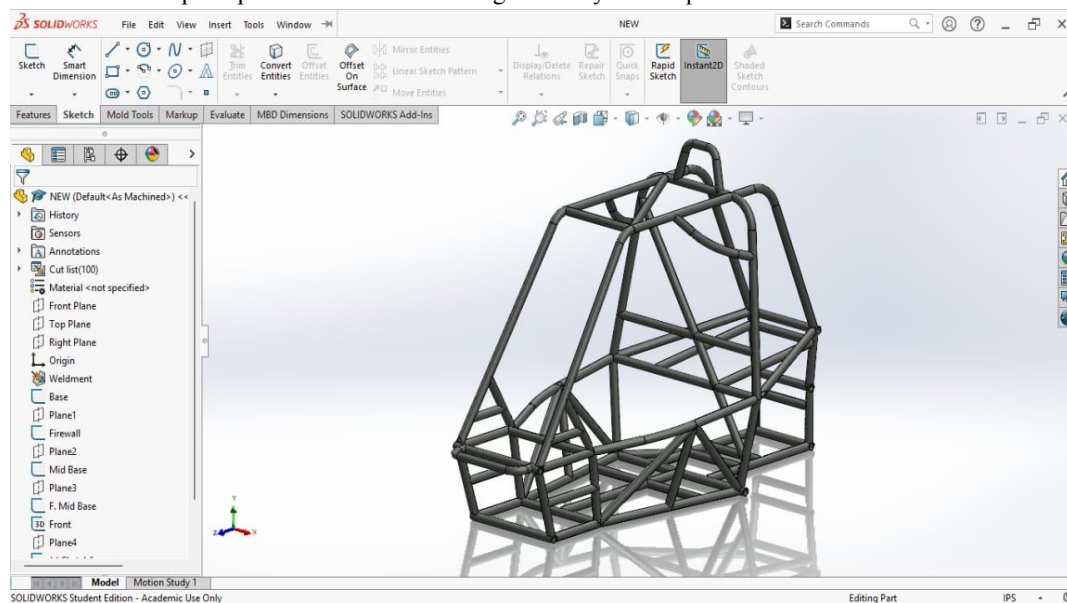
Isometric 3D geometry and structural wireframe layout designed in SolidWorks
